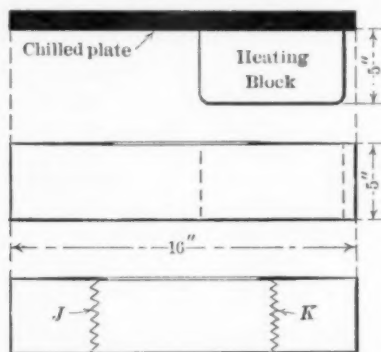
CHILLED PLATE WITH HEATING BLOCK ATTACHED AND SEPARATED CASTING
